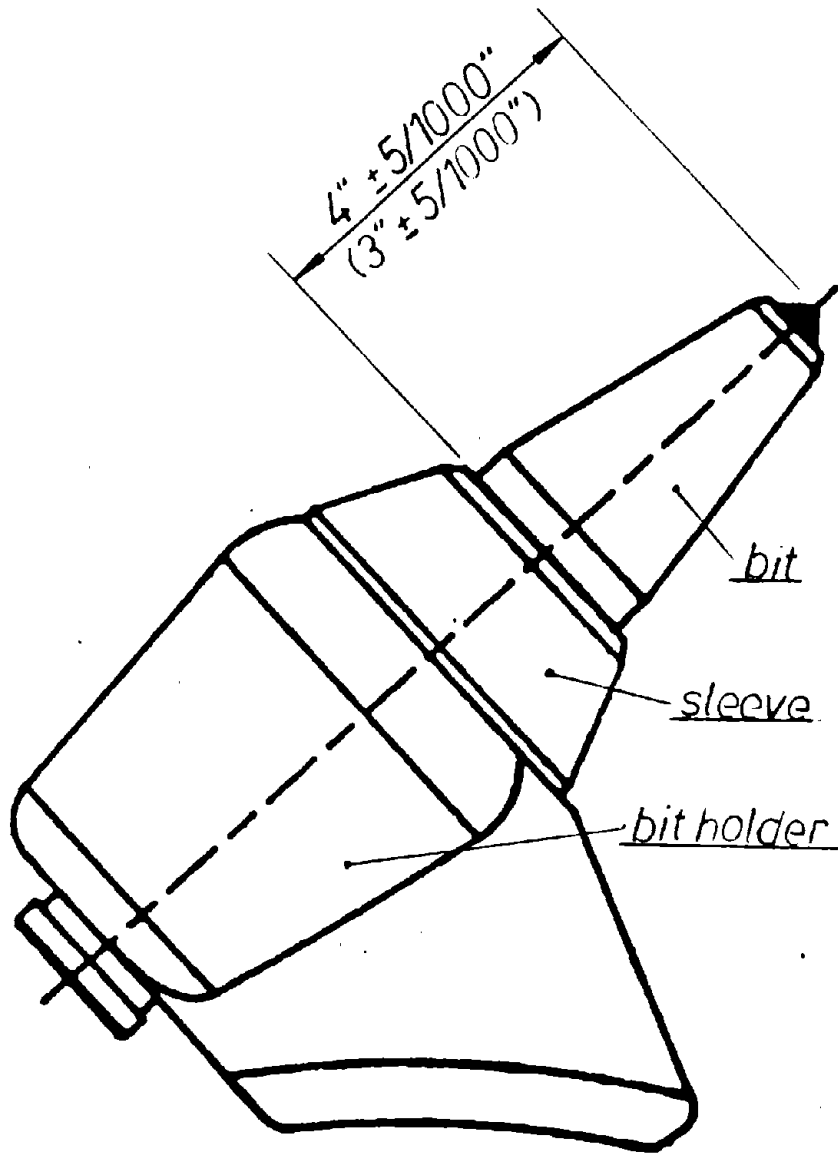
Typical arrangement of bit, sleeve, and bit holder
